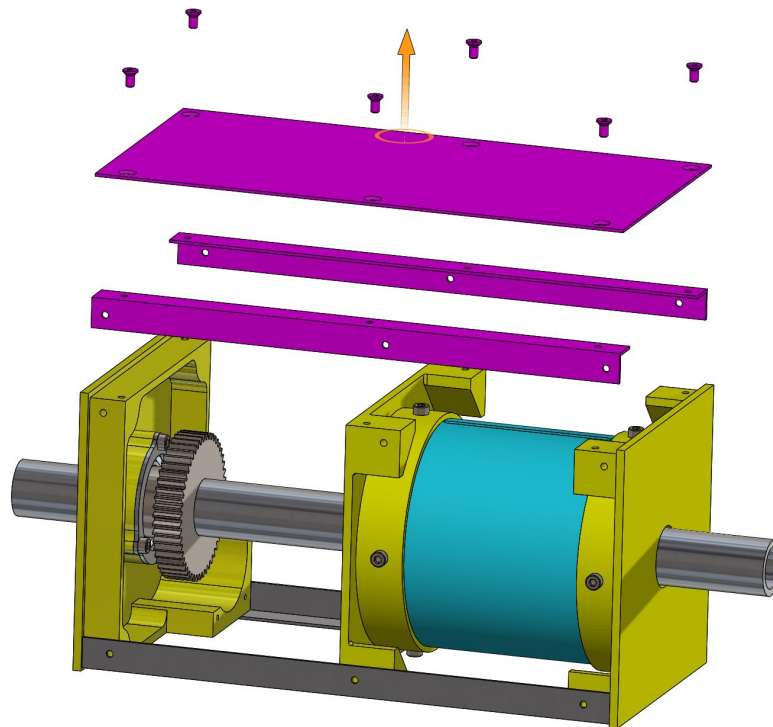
Fasten one of the flat walls to the top of the assembly, with two L-profiles and six socket countersunk head screws.
